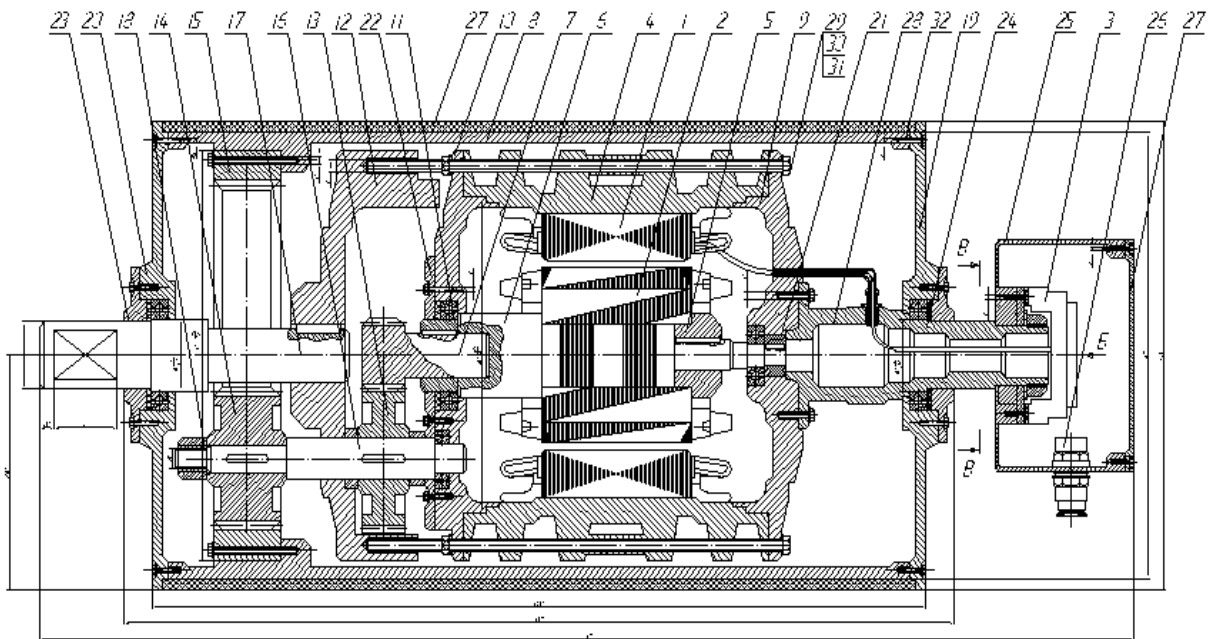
Section of the motor-drum drive of the belt conveyor
